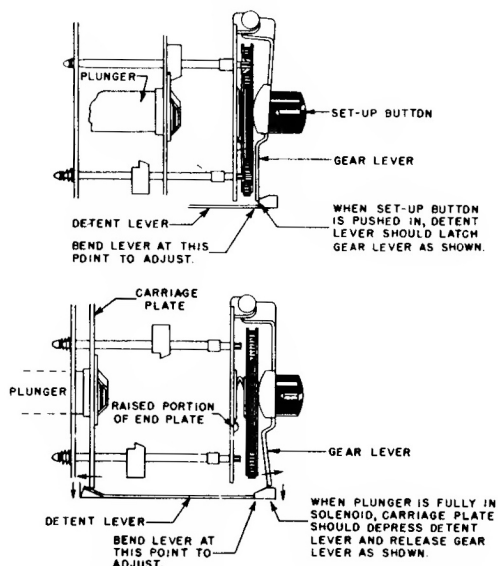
GEAR LEVER LATCH ADJUSTMENT
